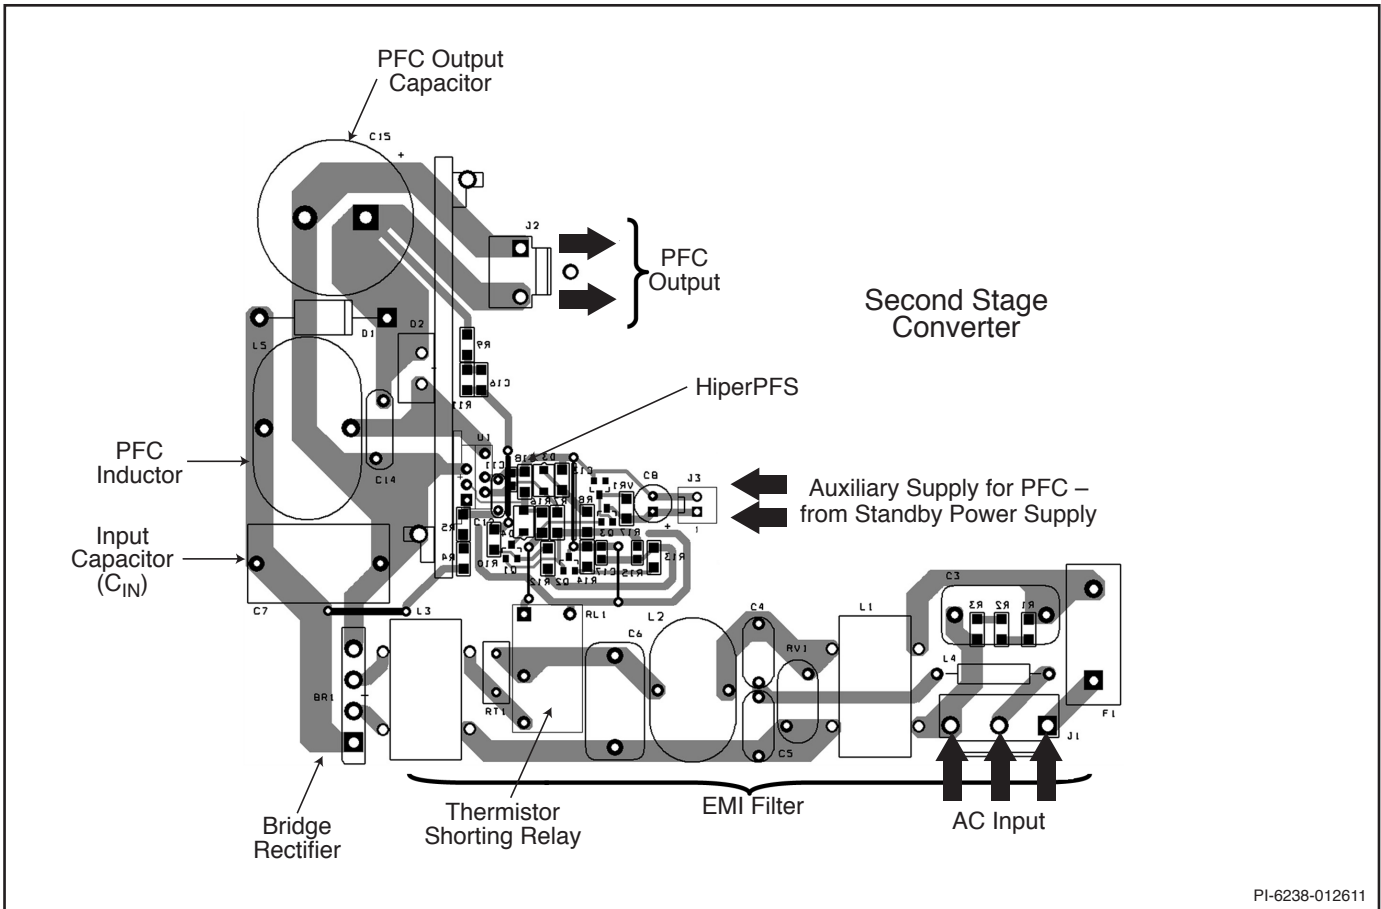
PCB Layout Example for System Power Supply consisting of a PFC and a Second Stage Converter.
